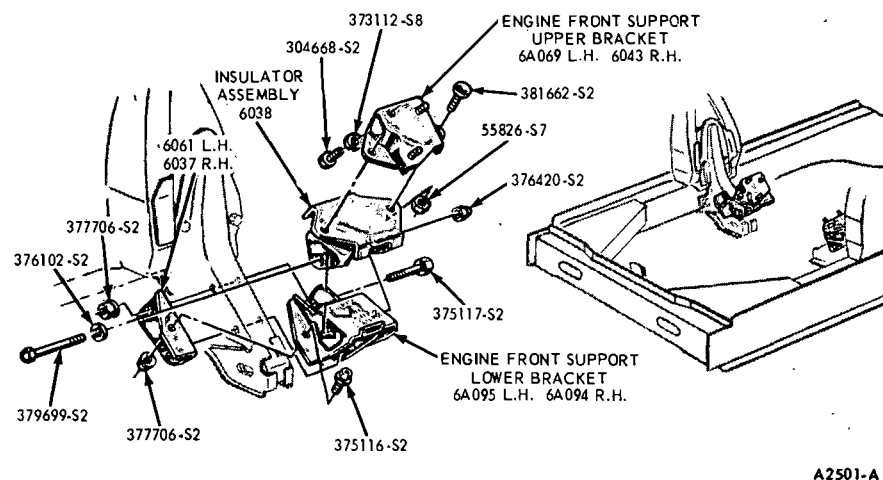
Engine Front Supports— Mustang with 390 V-8
